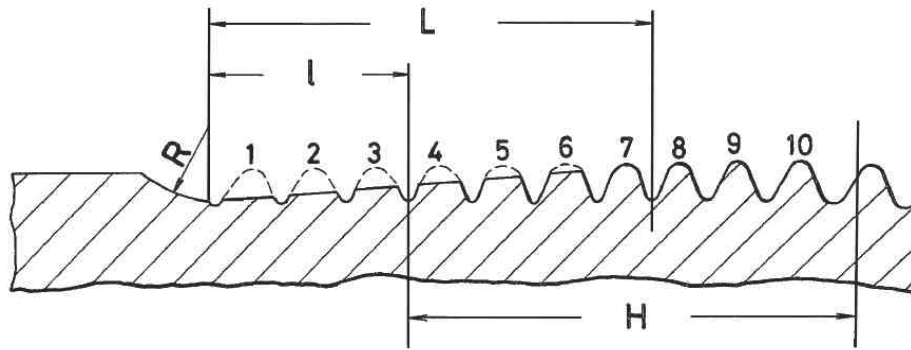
Patented thread run-out by Nisida et al [2.70].
